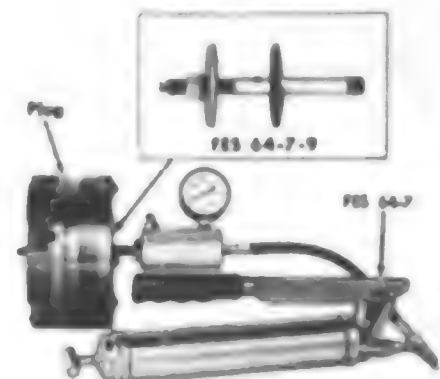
View showing IH relief valve test kit FES 64-7 being used to check piston inner and outer seals for leakage. Refer to text.
